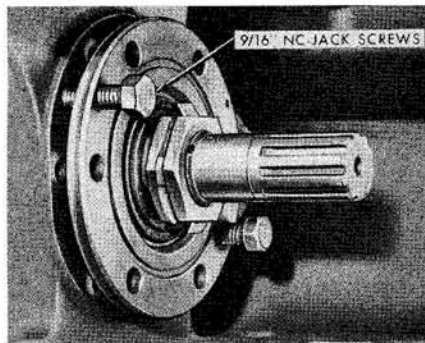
View of rear axle center housing with lift cover removed, showing suggested method of pulling drive pinion. Differential unit must be removed to provide clearance for pinion pilot bearing.
